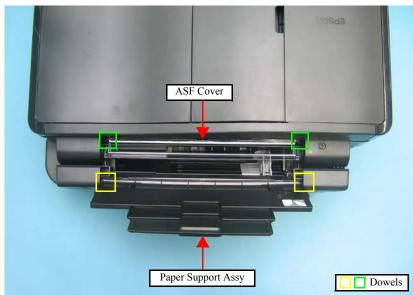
Removing the Paper Support Assy/ASF Cover
